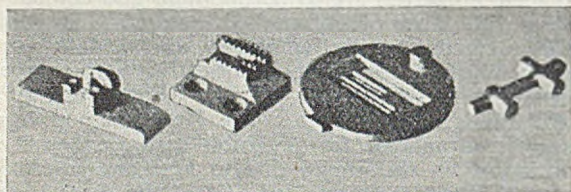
Selection of Parts for Sewing Machines made by Investment Casting.
